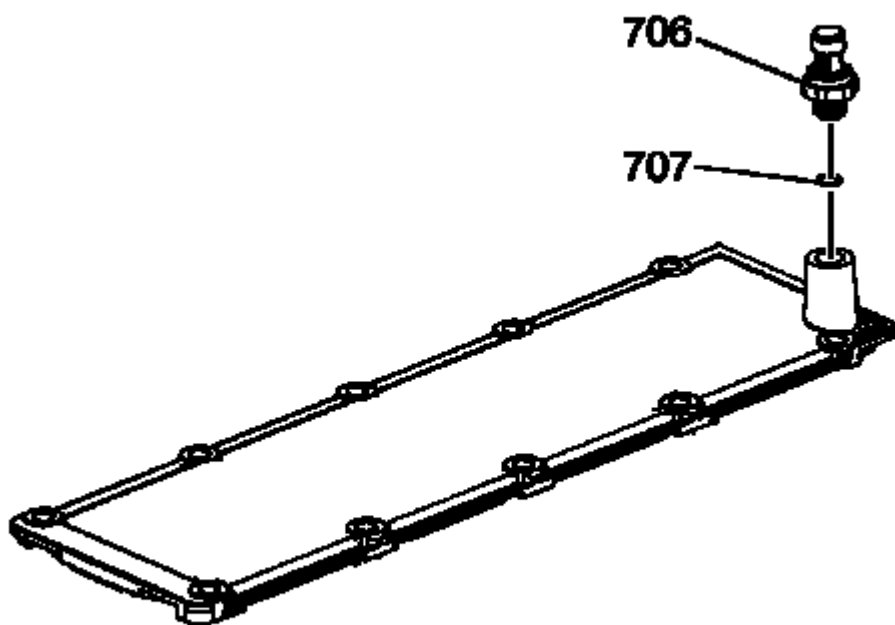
View Of Oil Pressure Sensor, Washer And Valve Lifter Oil Filter
